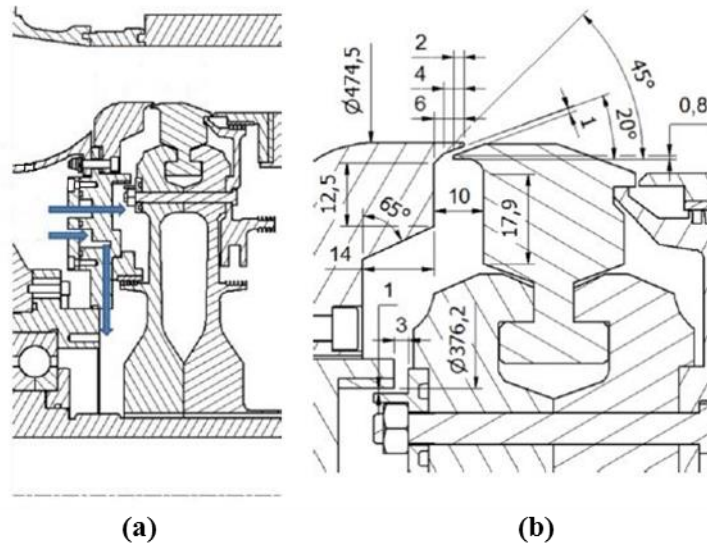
The single-stage turbine rig at the University of Oxford - (a) cross-section of the turbine; (b) rim-seal geometry and dimensions (adapted from Beard *et al.* (2016))
